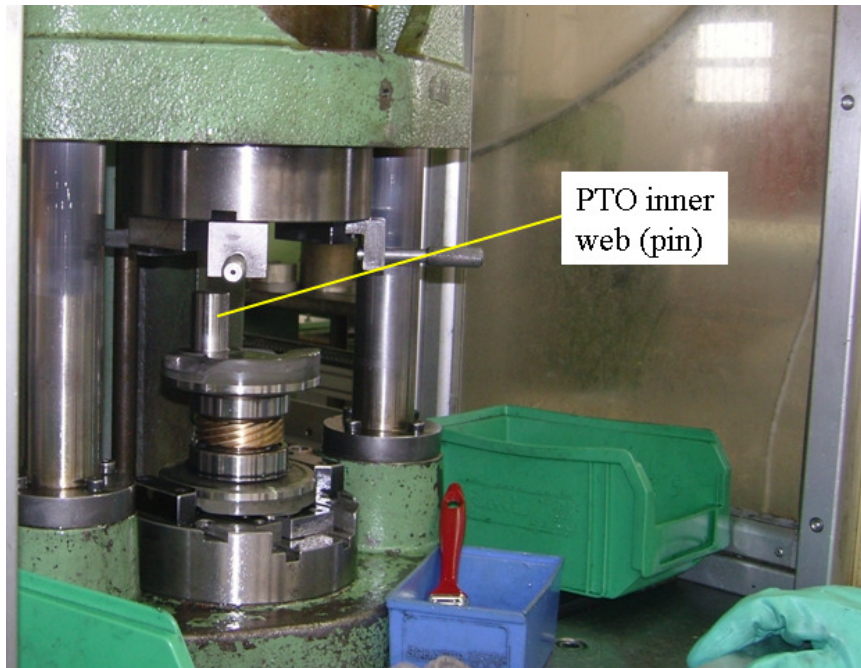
The PTO inner web assembled to the main shaft [6].
